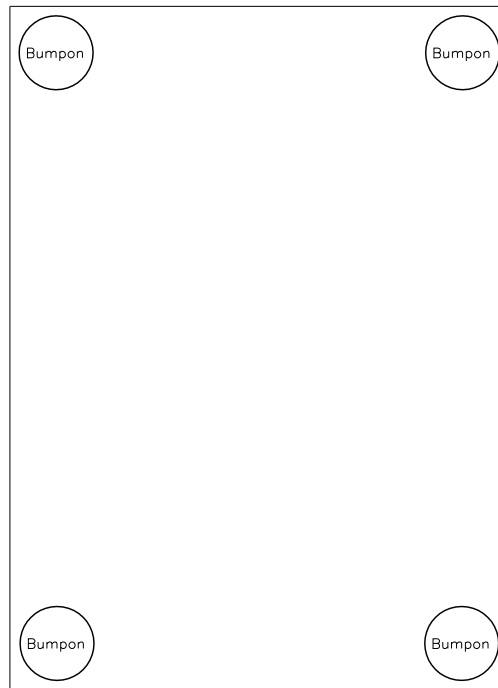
TPS53311EVM-561 Bottom Assembly Drawing, Bottom View
